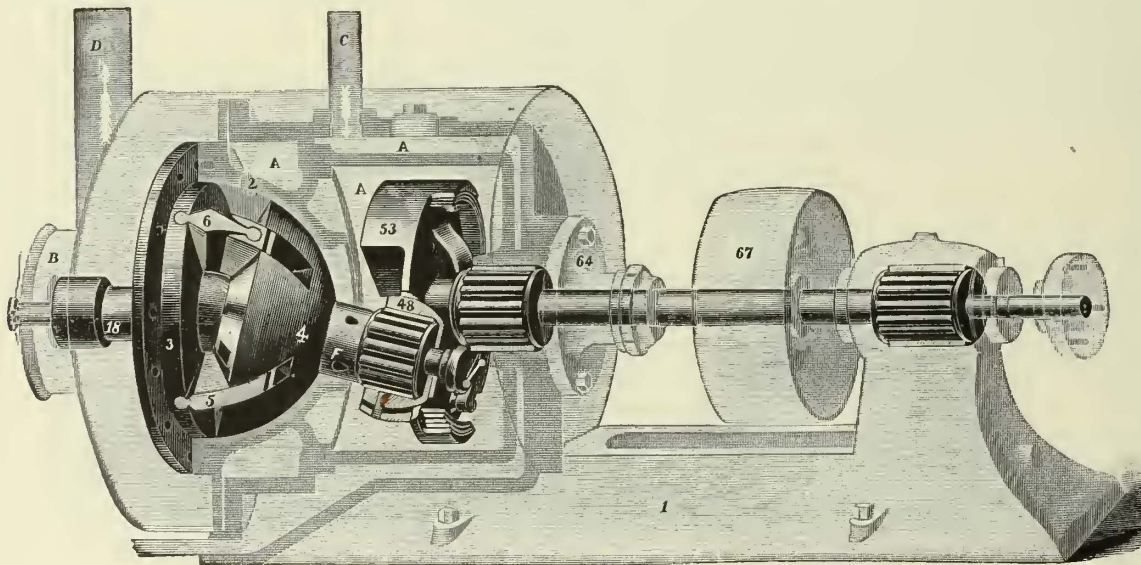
WORKING PARTS OF AMERICAN HIGH SPEED ENGINE.
